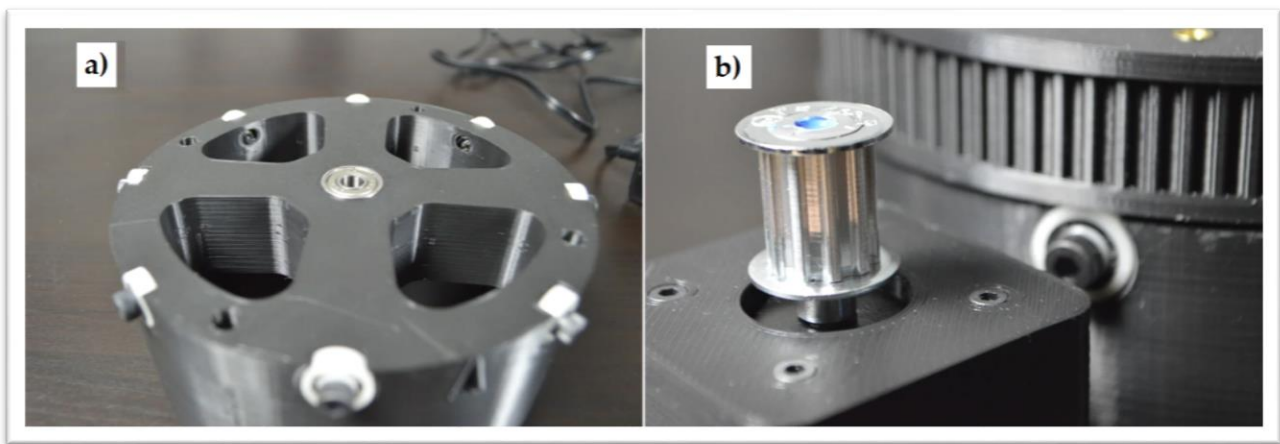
Base joint of the Moveo robotic Arm. a) Bottom part. b) Pulley. From [47]
